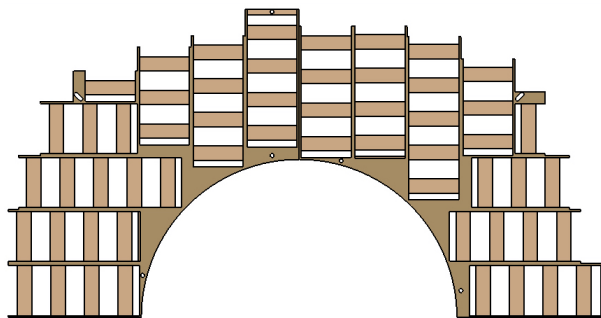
Drawing of inner support unit with holes for fixation on the cooling plate
